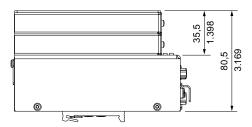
Dimensional drawings of the device with vertical mounting angles
